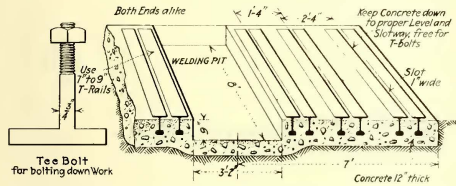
THERMIT WELDING BED, 14 FT. LONG, 8 FT. WIDE. Made of concrete flush with ground. Old rails set with bases projecting $\frac{1}{2}$ in. above concrete. All rail bases set to perfectly level plane surface. Holding-down bolts used to bolt parts to be welded.
